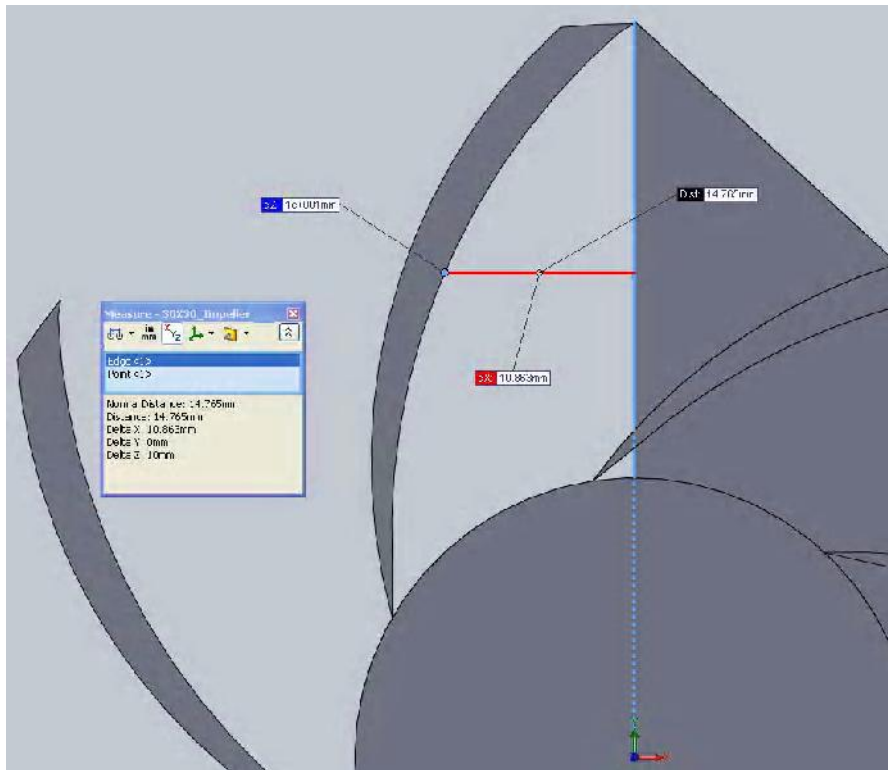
Horizontal measurement from Blade Angle Center to Center of Impeller Rotation
